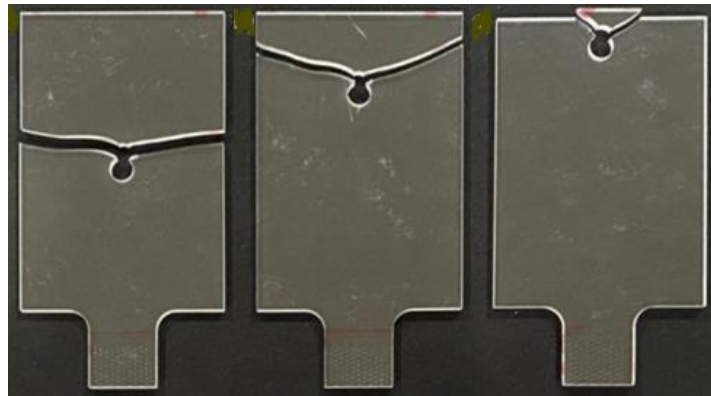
Specimen fracture with 5 mm pin: left) Specimen #4, center) Specimen #5, and right) Specimen #6.
